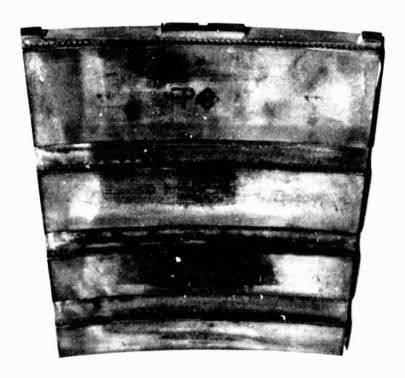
Combustor Component Outer Rear Advanced Liner Segment
